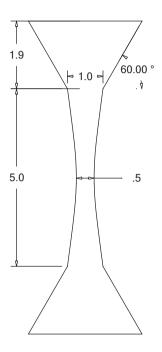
C1 Acrylic test specimen. Test specimen is sized to fit in custom clamps. Failure zone dimensions are 0.5 cm by 1 mm thick to limit failure loads to a manageable level for desktop tensile test machines. Dimensions are not critical. Specimens are best cut via laser.
